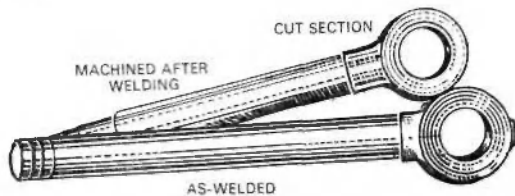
Piston rods for large earthmoving machines made by welding small eye forgings to bar-stock. Parts stock for piston rods was reduced from 150 one piece forged items to 25 basic eye forgings which were then welded to rods of required length
